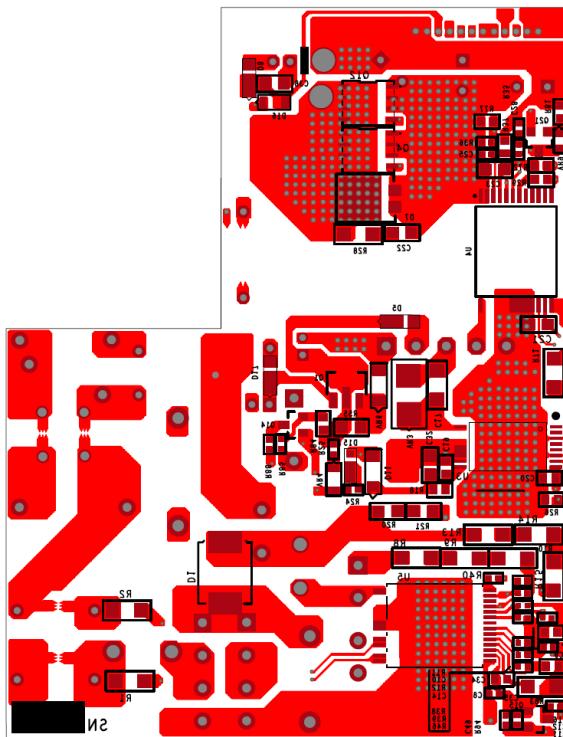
Main Board Printed Circuit Layout, Bottom.
